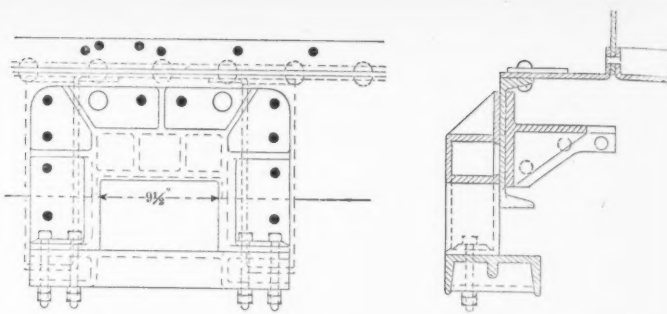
END SILL CONSTRUCTION AT STRIKING PLATE—O-17 GONDOLAS.
